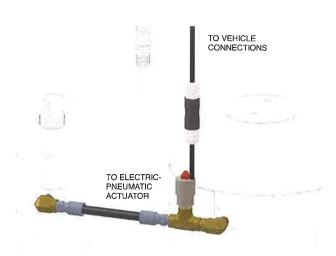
PRESSURE SWITCH INSTALLATION
